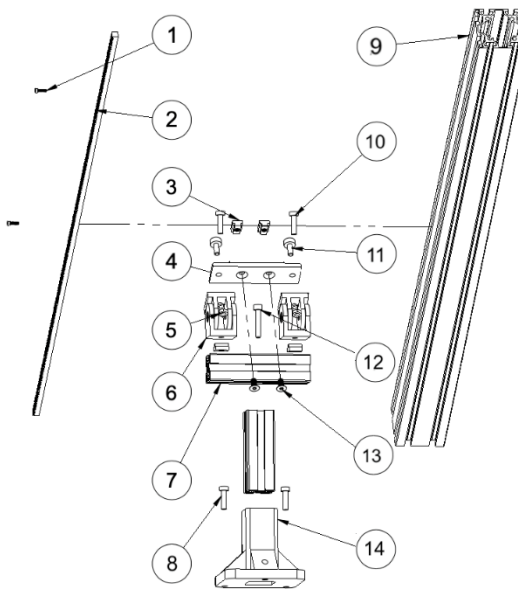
Exploded and labelled view of original rail support design, and pinion rack attachment
